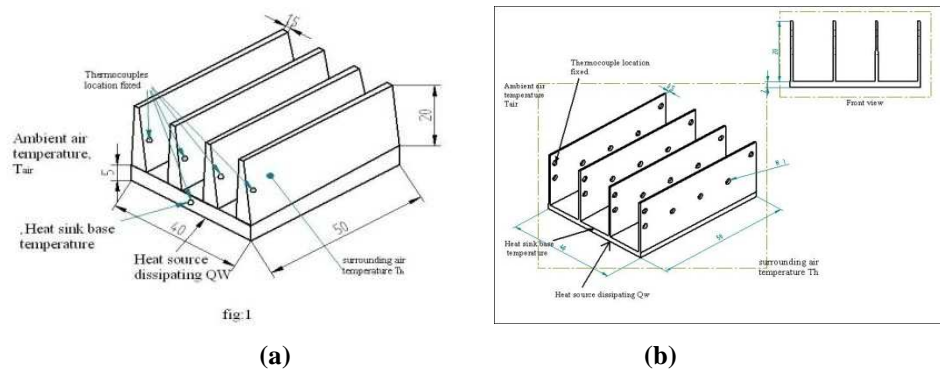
Heat Sink Specimen (a) Without Holes (b) With Holes
